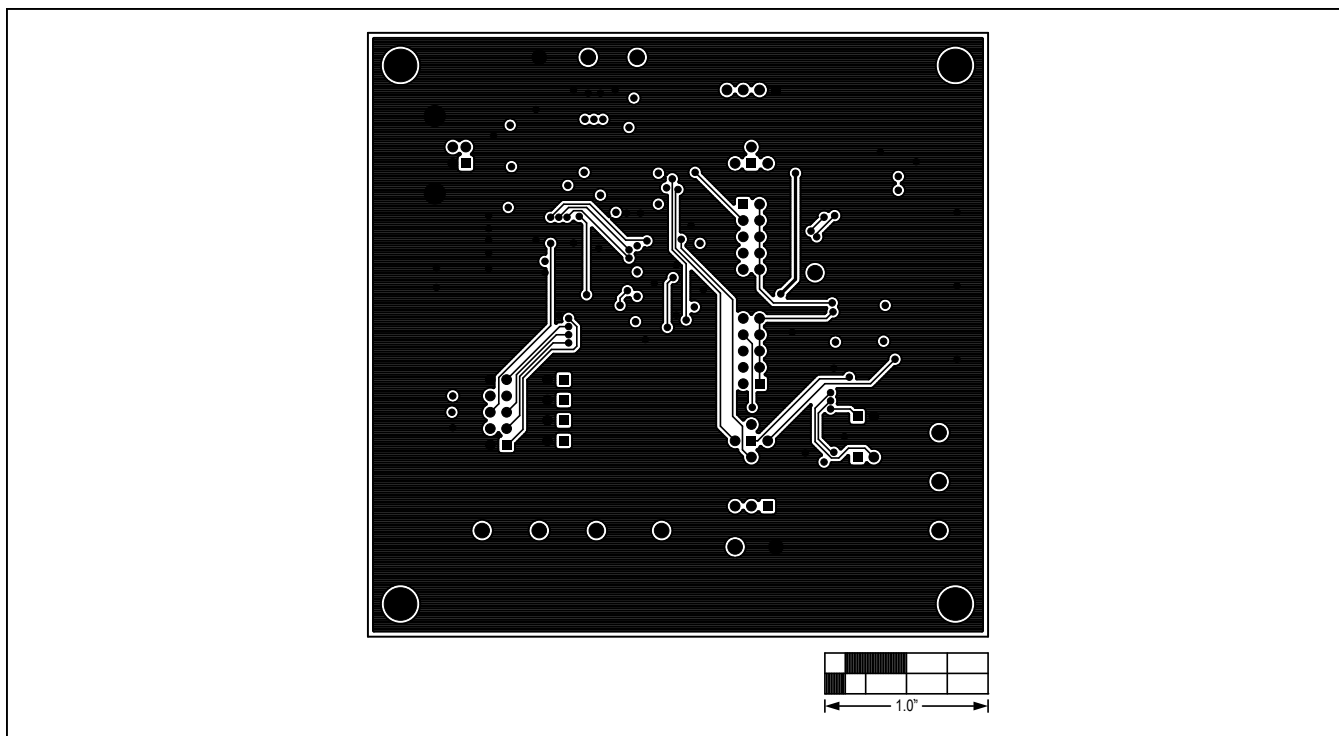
MAX5395L EV Kit PCB Layout—Solder Side
